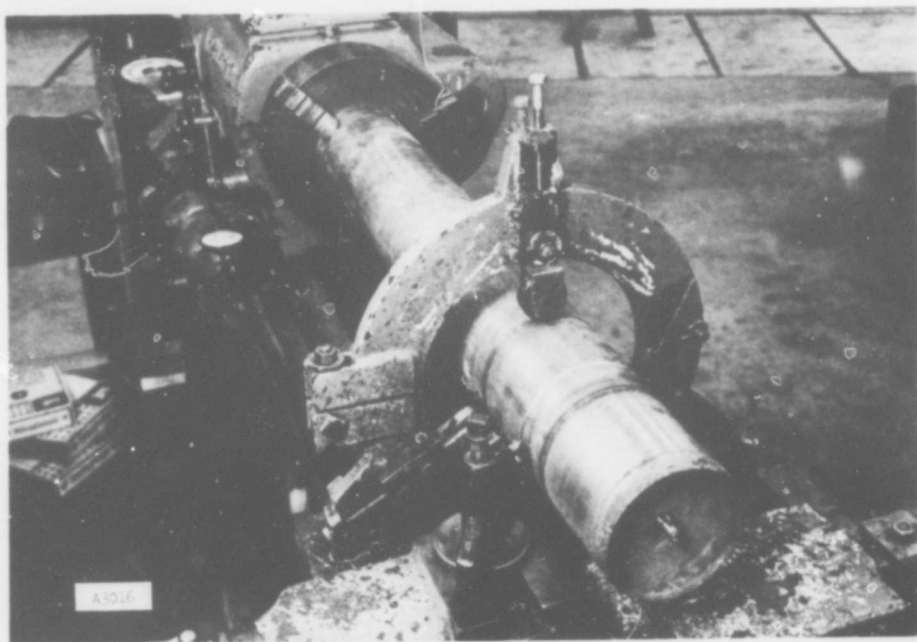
Shelby tube chucked in lathe for first rough machine cut.
